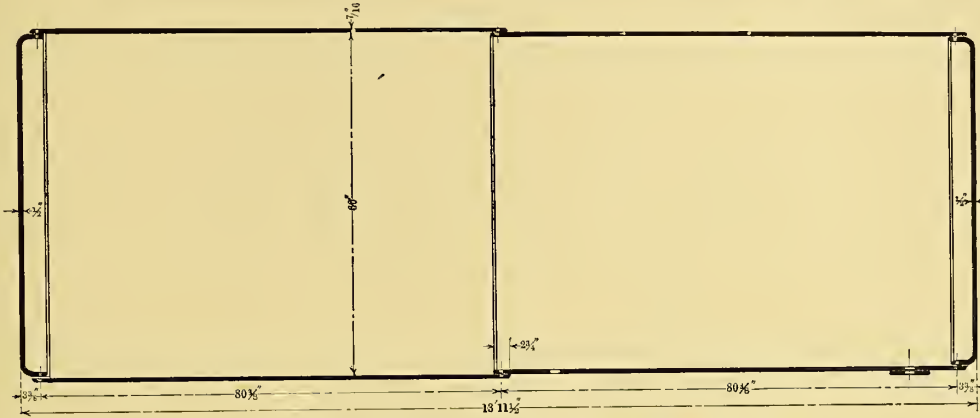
SECTION SHOWING OUTLINE OF BOILER SHELL AND HEADS.
